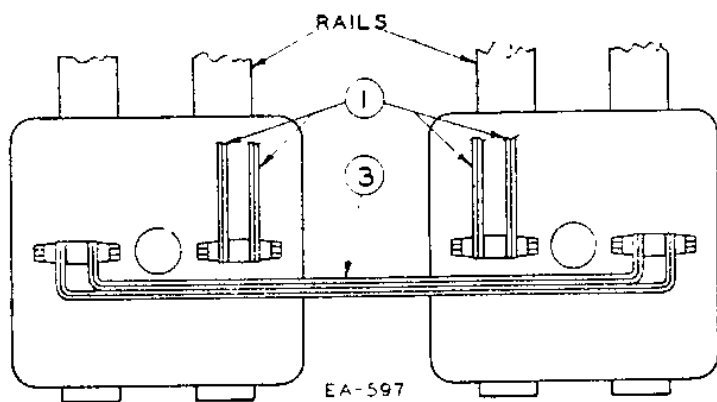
Detail showing nesting of interrack connector (3) when racks are back to back as in Fig. 11. (Detail shows four pieces, but connector can be made of one, two, or three pieces also.)
